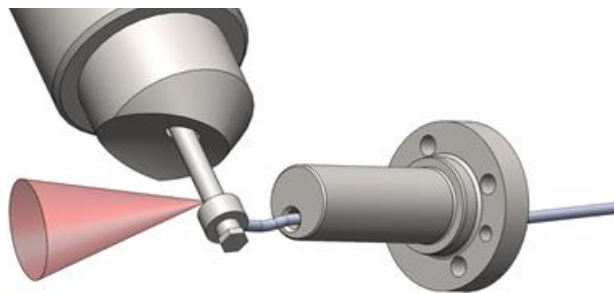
Sketch of injection assembly, including the injector holder, the elongated nozzle, the bush, and the fuel bypass piping.
